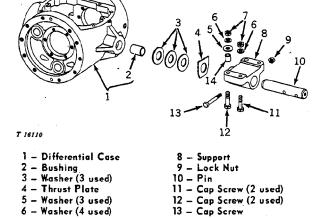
Axle Oscillating Pivot Assembly (Front)
